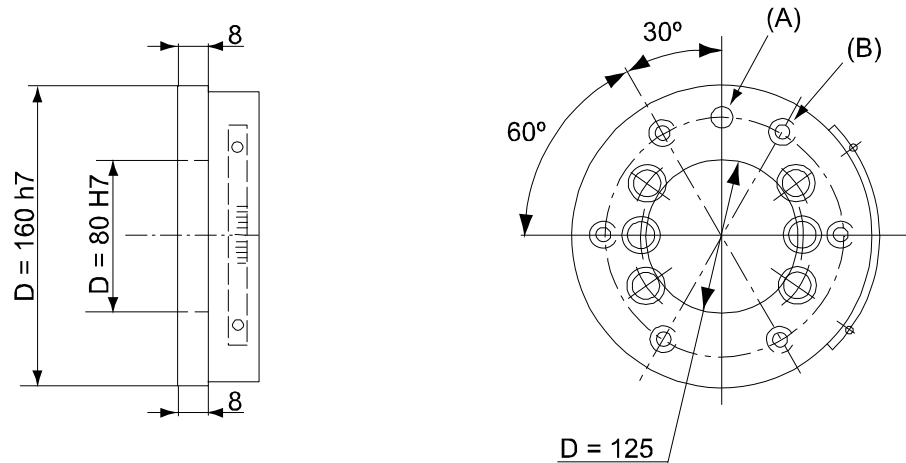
The robot tool flange, ISO 9409-1-A125 (dimensions in mm).
